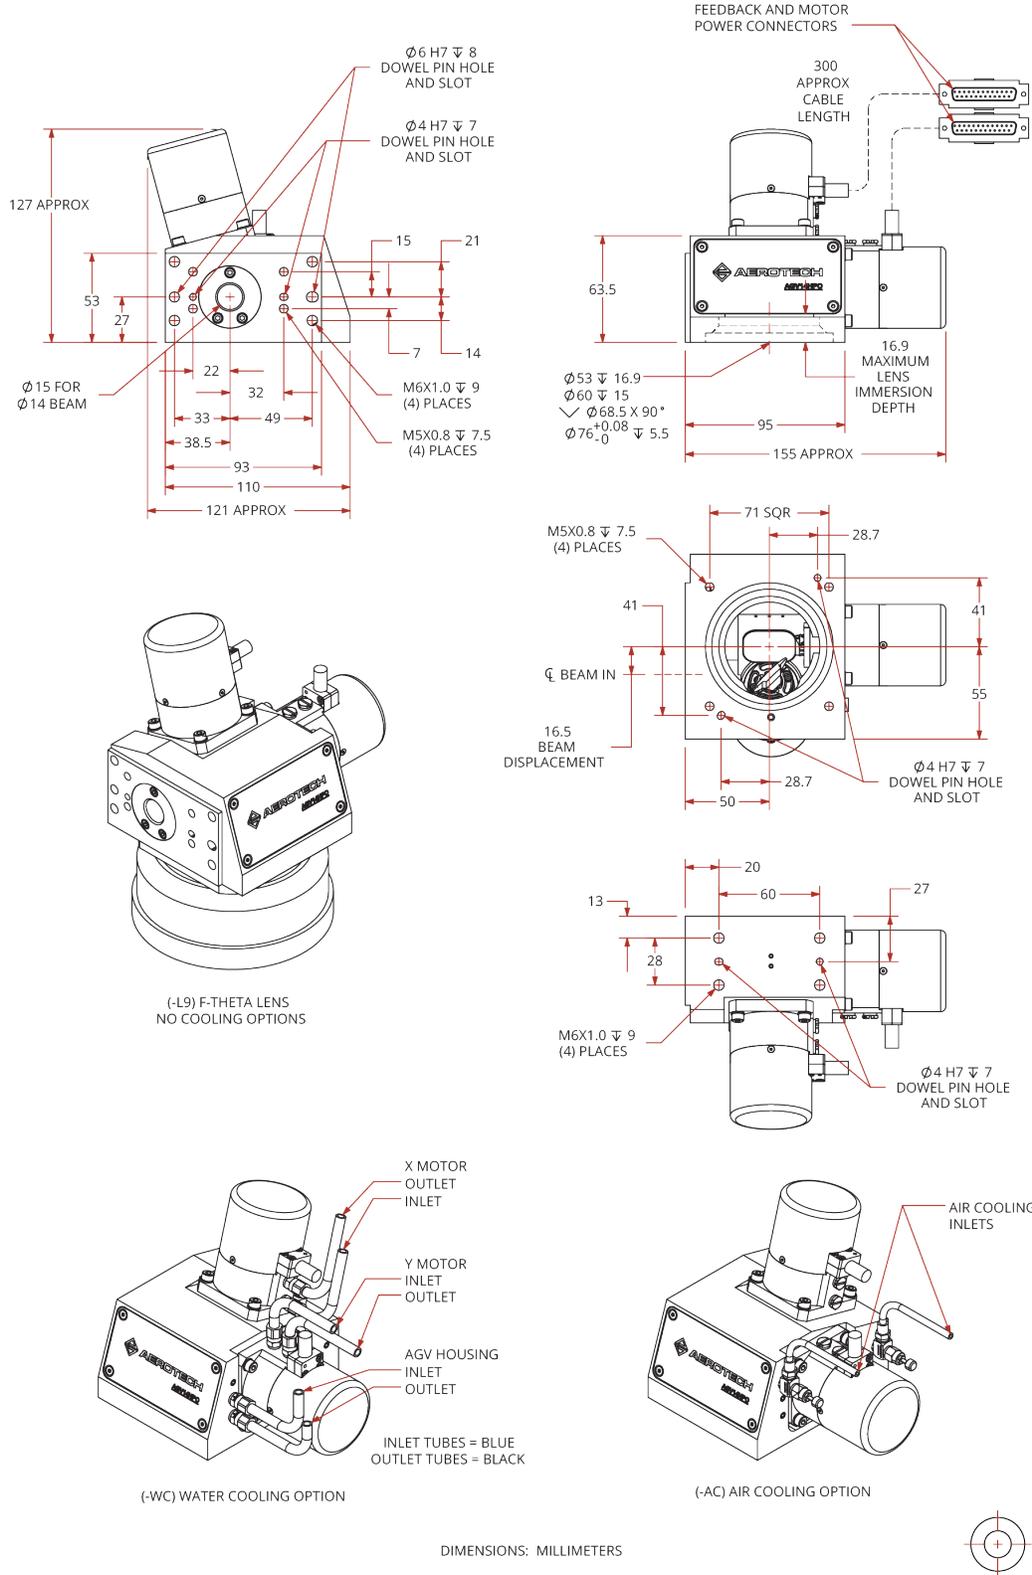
AGV20HPO-BE1 Galvanometer Scanner Dimensions
